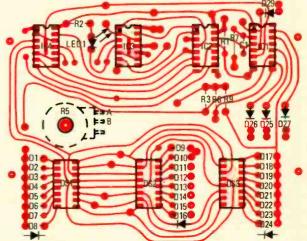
PARTS LAYOUT for the Sequencer board. Be sure to check the polarity of the many diodes that are used.
